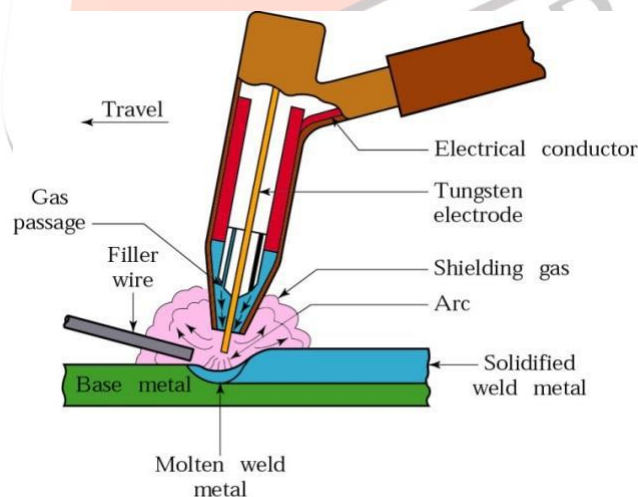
TIG Welding Process (Serope Kalpakjian, 2006) [8]
